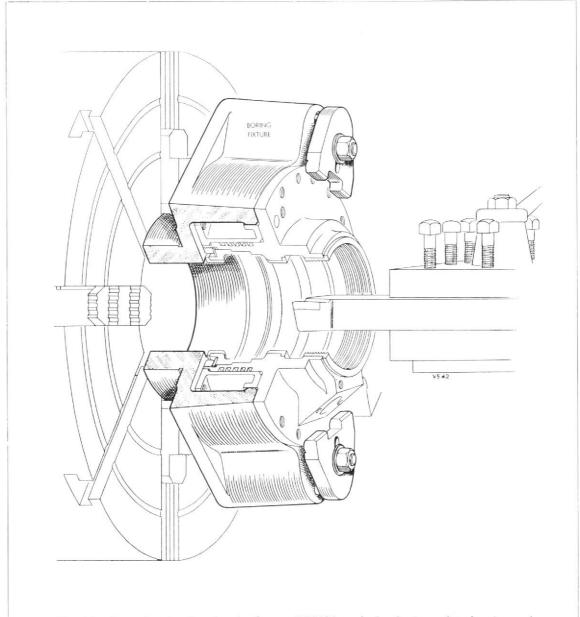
Rear bearing housing in fixture T.78136 ready for boring safety bearing and labyrinth bush.
